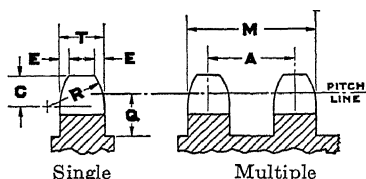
Standard tooth section profile. (Courtesy Diamond Chain and Manufacturing Company.)
